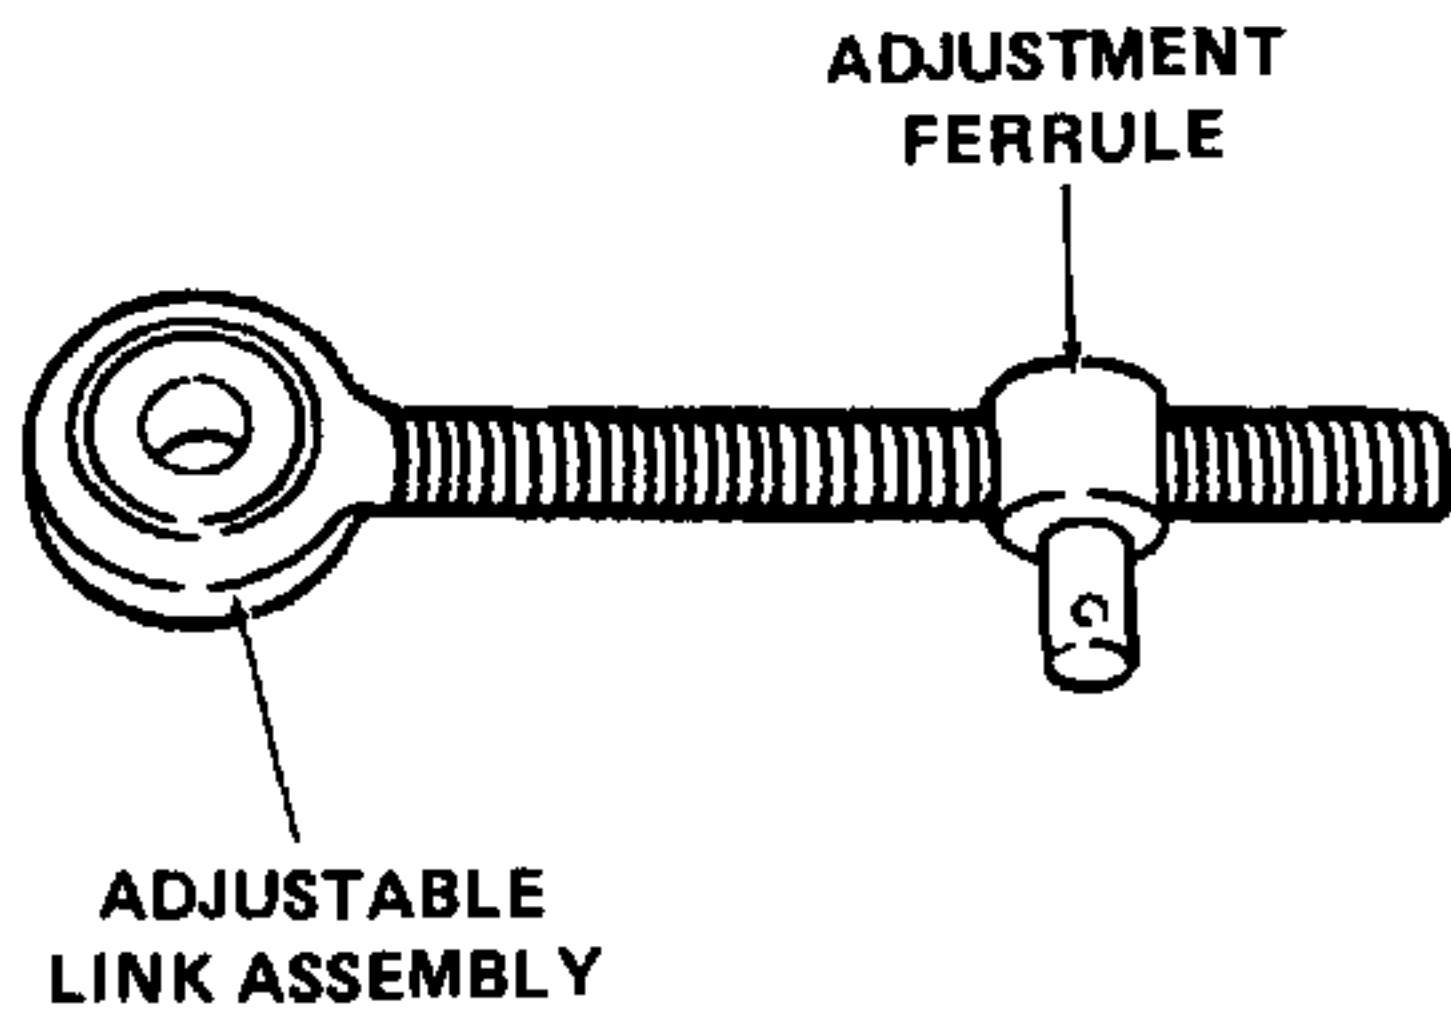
Threading Adjustment Ferrule on Adjustable Link Assembly.
